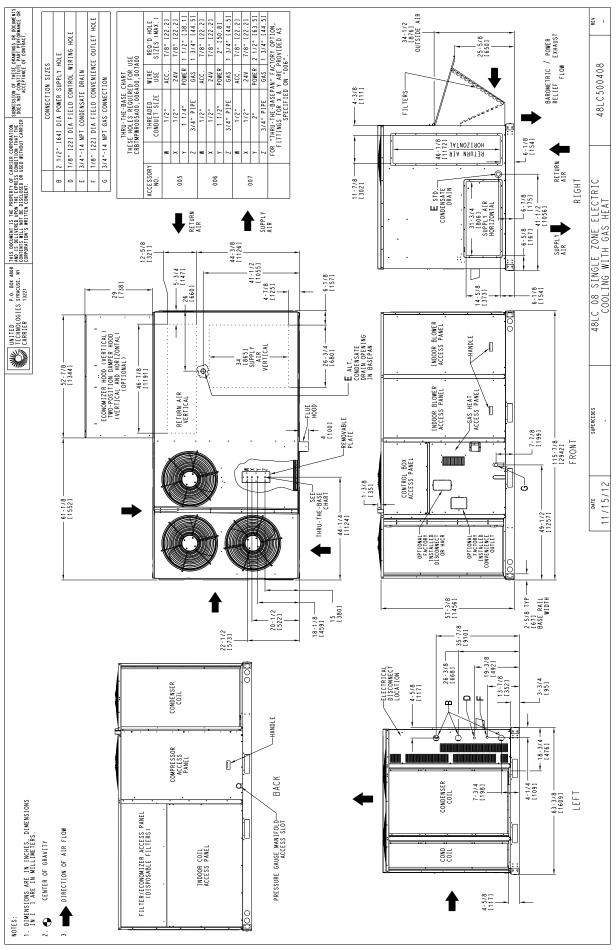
Unit Dimensional Drawing - 08 Size Unit
